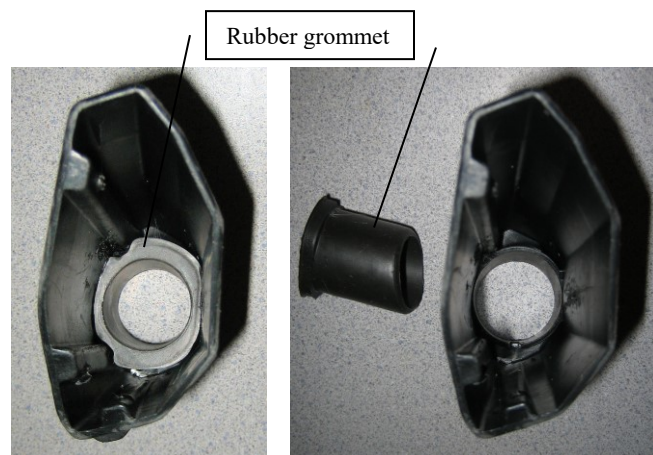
Inside view of end cap identifying rubber grommet installed location (Left) and appearance after removal (Right).
